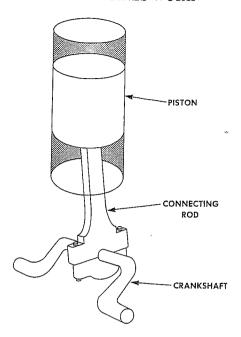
The connecting rod is connected to an offset shaft called the crankshaft.
